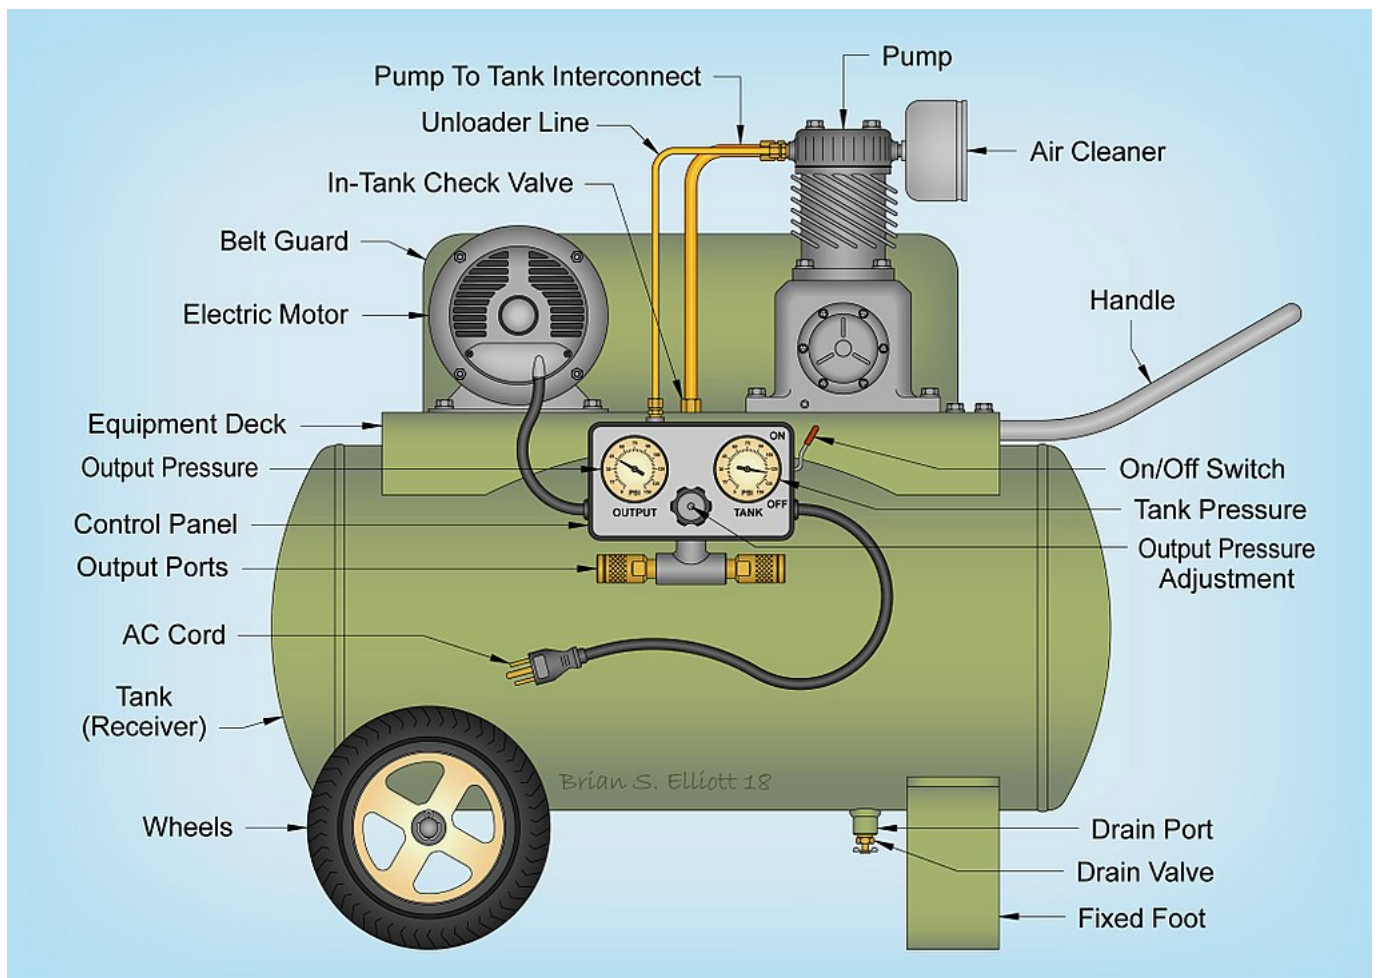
Technical Illustration of a portable single-stage air compressor
